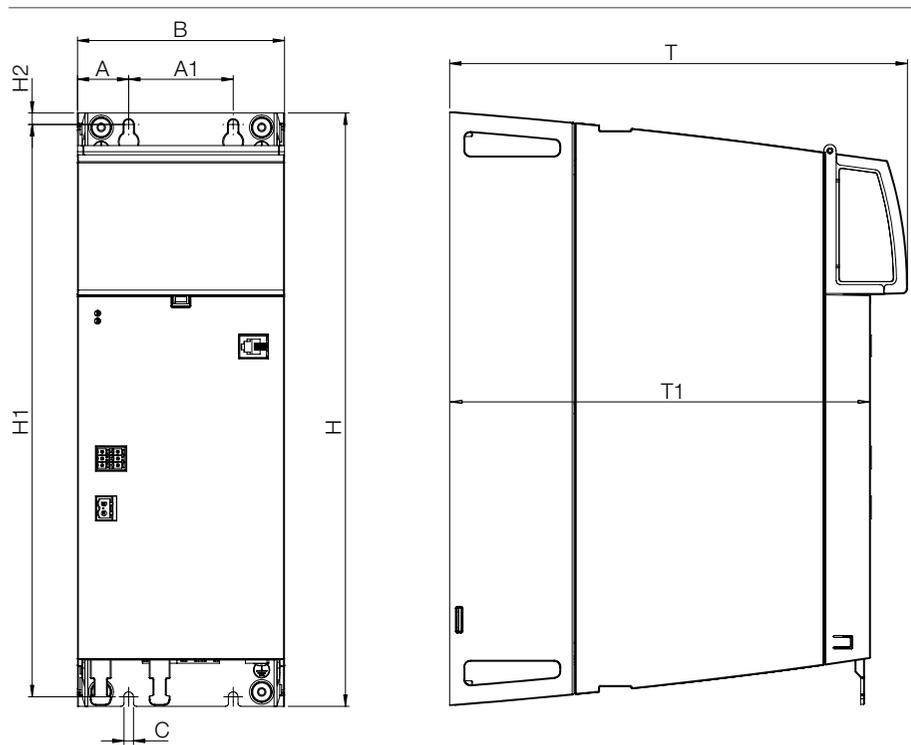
Dimensional drawing, supply unit BG2, for dimensions see Table 3.1
